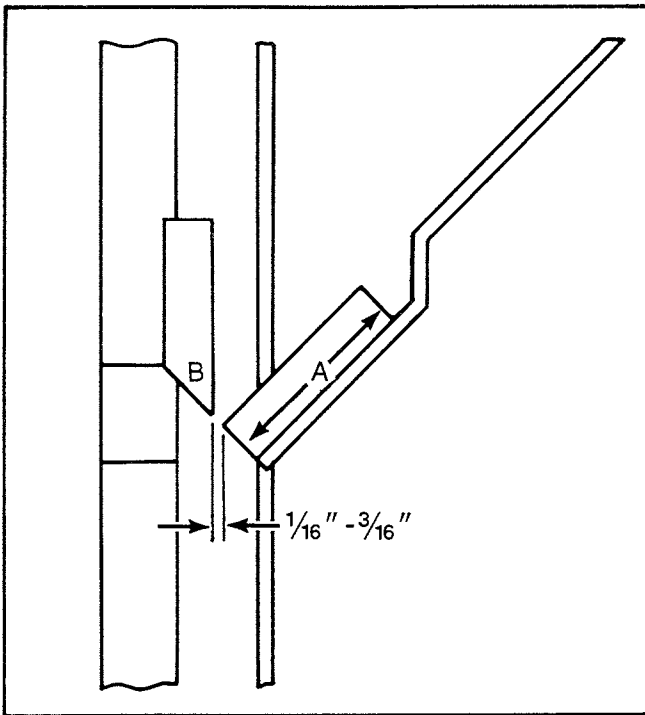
The chipper blade should be sharpened at a  $45^\circ$  angle.
